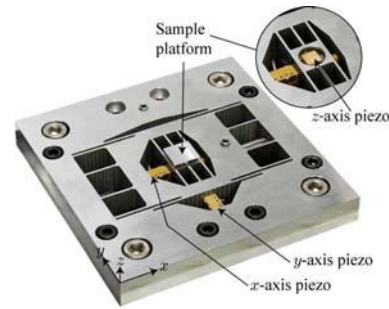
Second-generation three-axis serial-kinematic stage. The monolithic design was fabricated using wire electric discharge machining.
